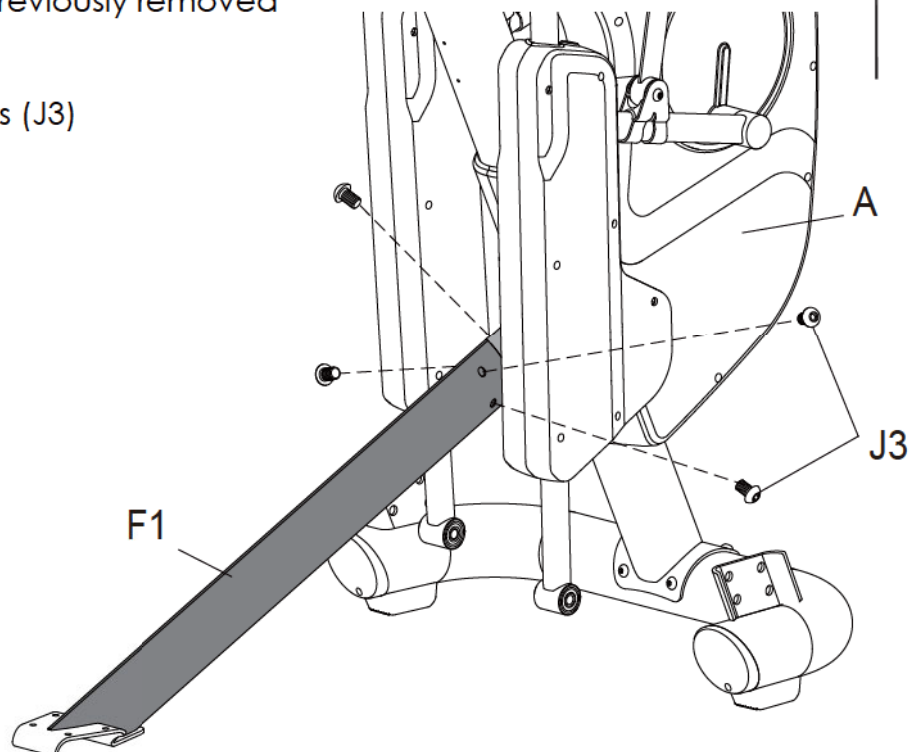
ASSEMBLY FOR SUPPORTING TUBE COVER
